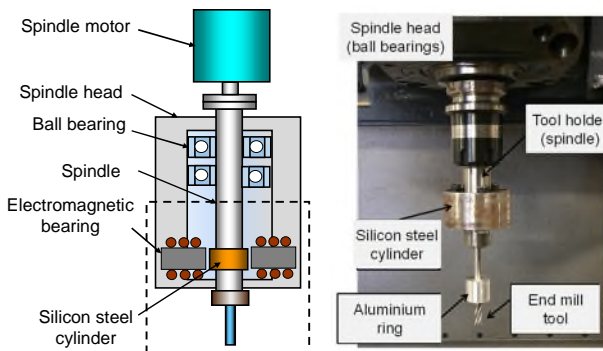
Schematic of proposed hybrid spindle system with ball and electromagnetic bearings
